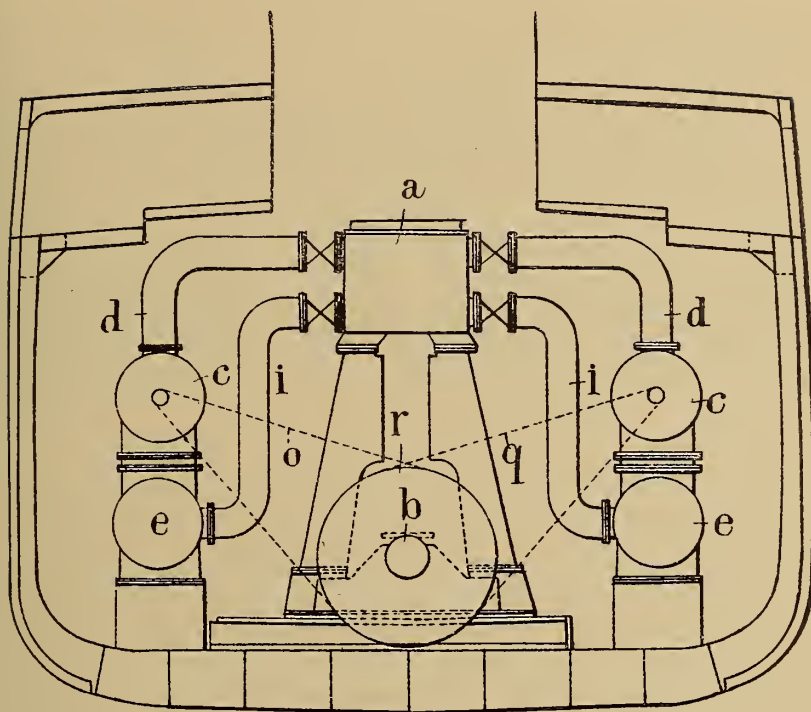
SECTION OF VESSEL, SHOWING ARRANGEMENT OF RECIPROCATING ENGINE AND TURBINE WITH SINGLE PROPELLER SHAFT
